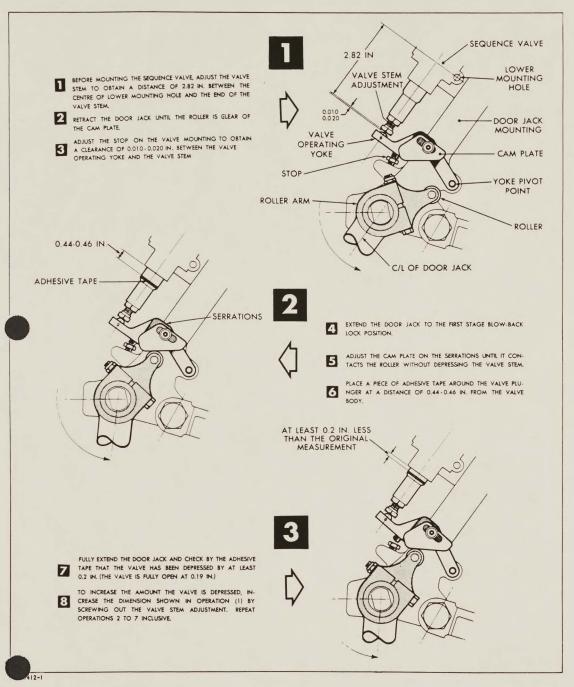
WHEEL DOOR SEQUENCE VALVE ADJUSTMENT
